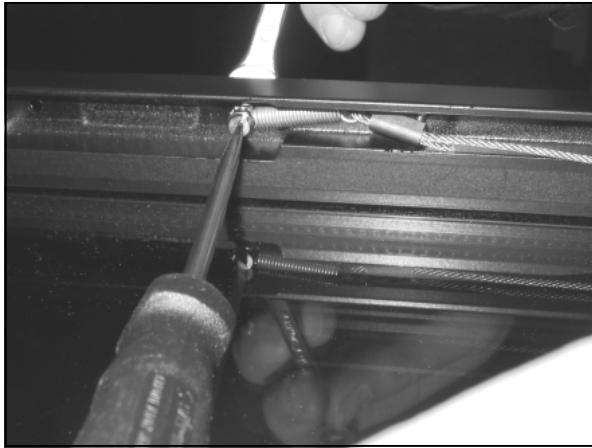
Installing the spring and cable assembly in the lower mounting hole
